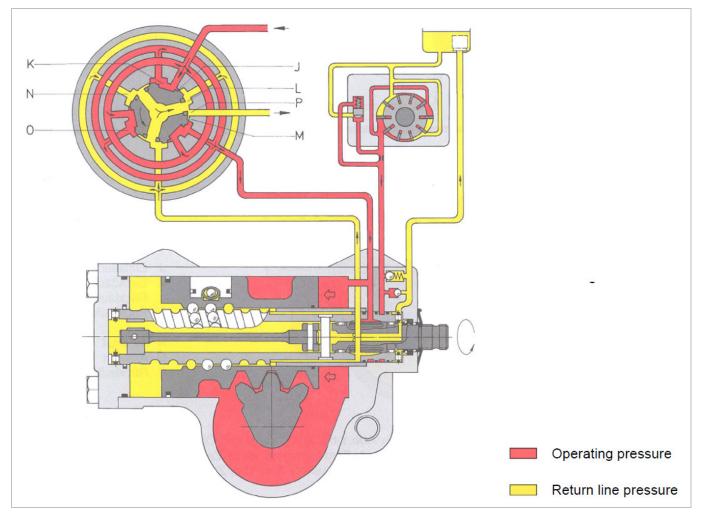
Valve rotor in operating position; Steering wheel turned counter-clockwise, piston with right-handed thread
